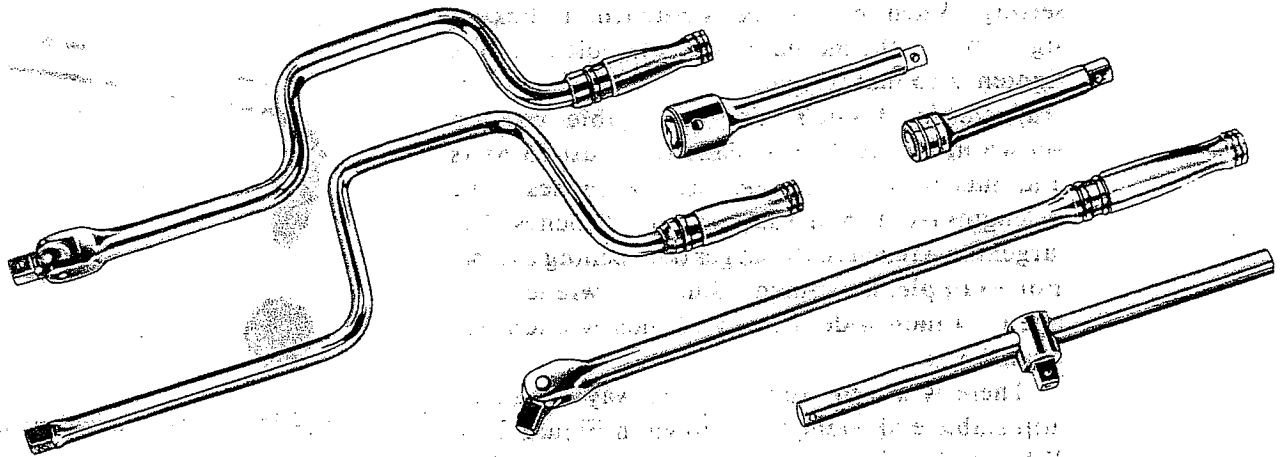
Socket wrenches are used with different handles and attachments. (Snap-On Tools Corporation)
